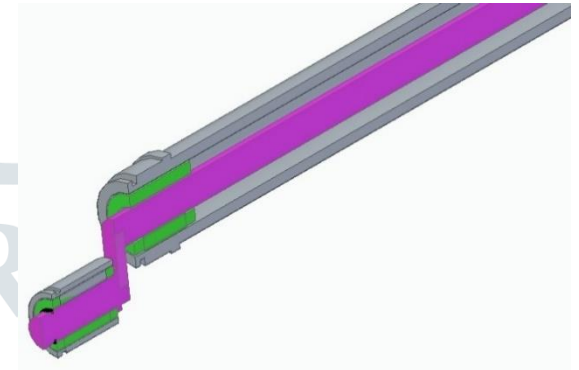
A cut-section of the assembled rotary and pitching shaft
